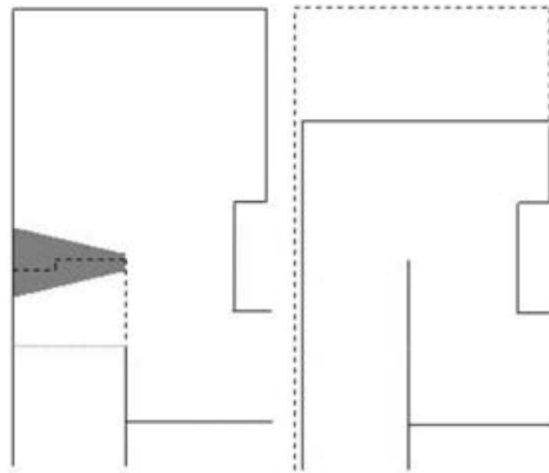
Joint line diagram for welding (left) and machining (right). The thin grey line on the welding joint diagram is the old weld joint line. [3]
